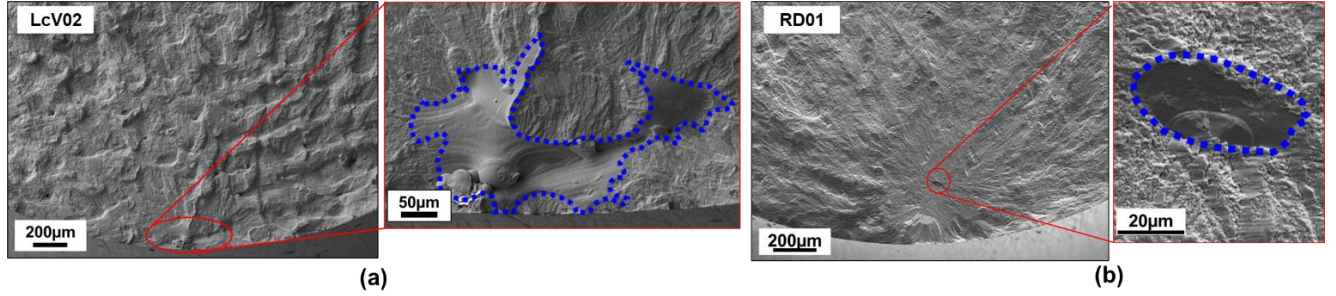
The critical defects of specimens (a) LcV02 and (b) RD01 observed on the fracture surface and its contours.
